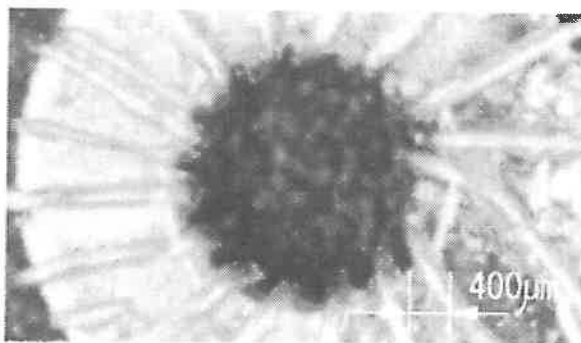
Enlarged photograph of the internal micro-gear showed in figure 15
